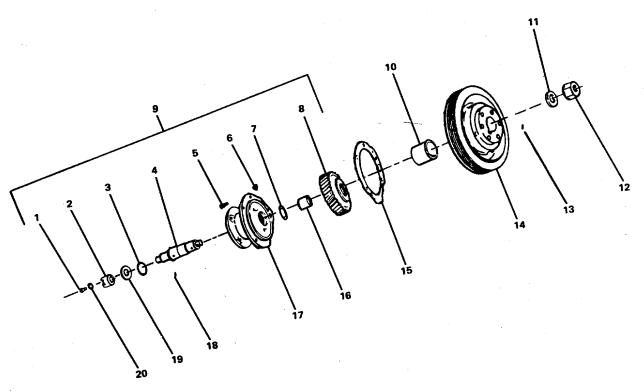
Power Take Off, Accessory Drive and Pulley Group.
